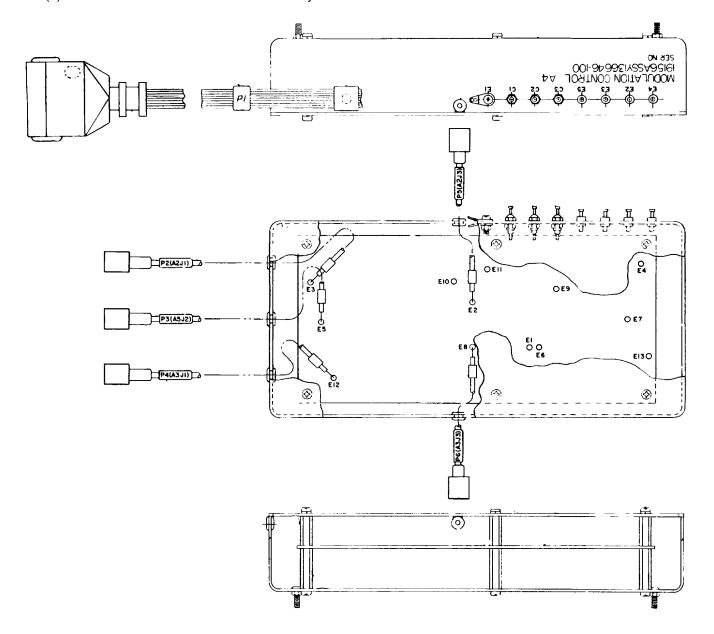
Modulation Control, 1A5A4 Parts Location Diagram
